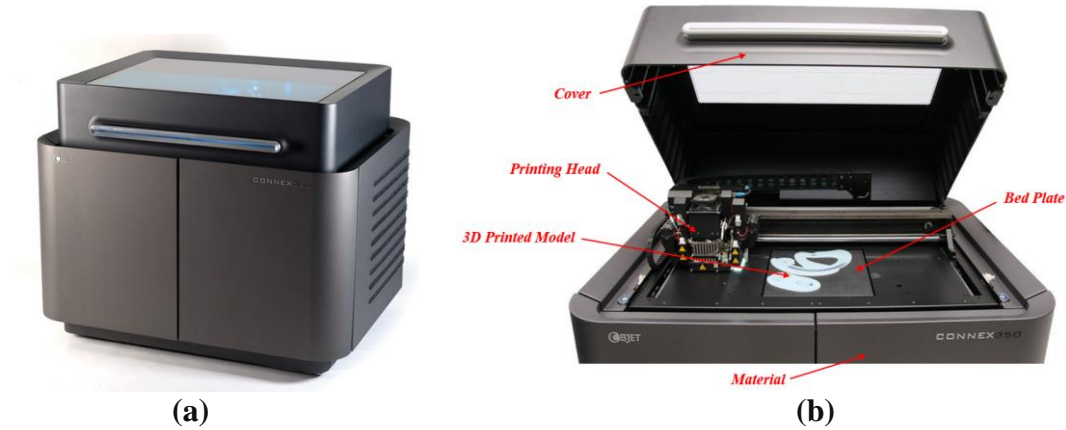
(a) Objet Connex350™ printer (b) Printer parts
